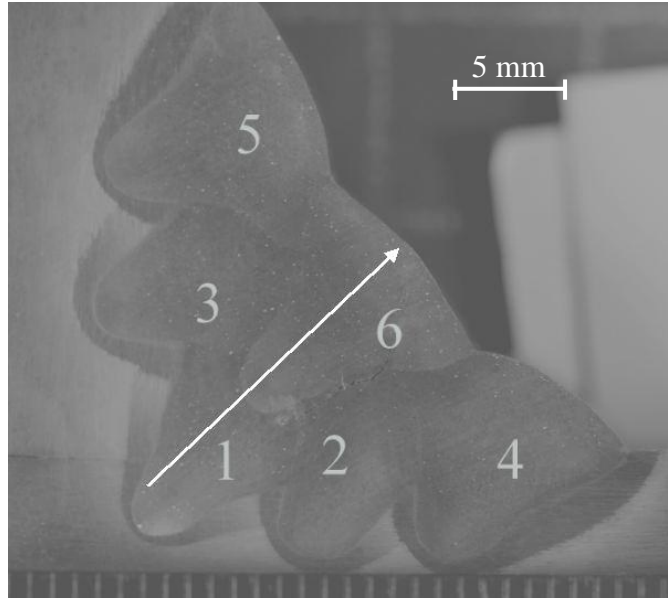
Crack test weld sequence and direction of measurement.
